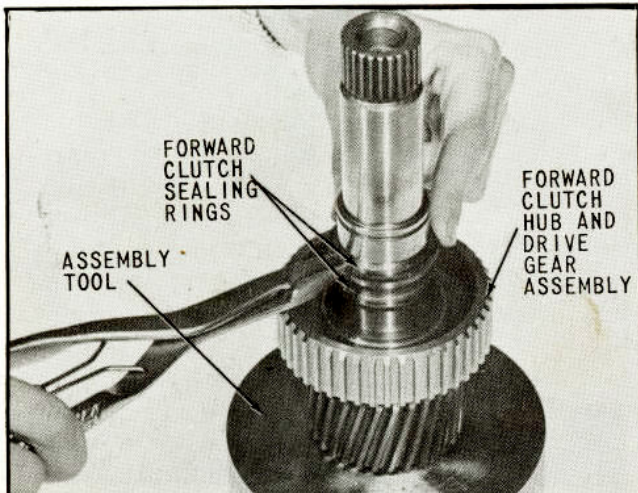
Installing Forward Clutch Sealing Rings on Drive Gear
